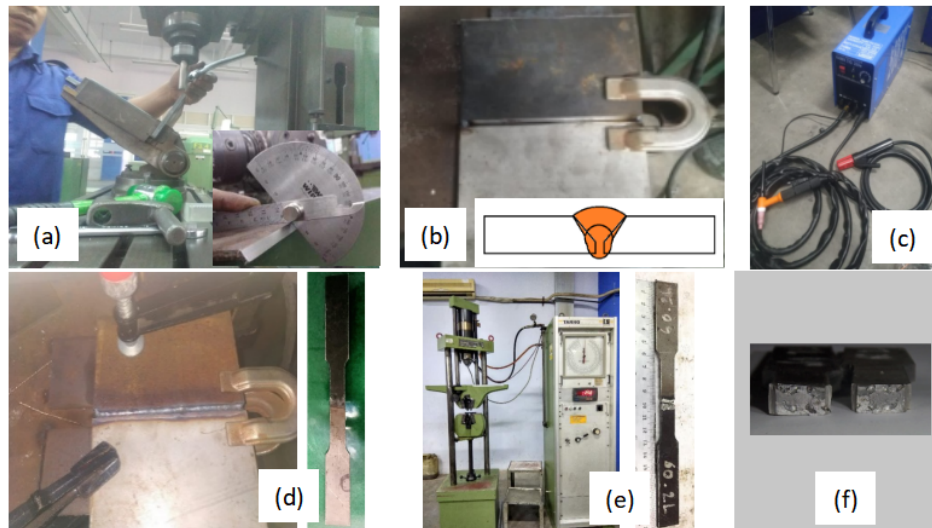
(a) Preparation of welded plate material by making side grooves at a 30° angle with a milling machine, (b) bonded with welds for setting the distance between the bimetallic, (c) welding with TIG Welding equipment, (d) cutting and shaping into a standard tensile test specimen size, (e) tensile testing with a Universal Testing Machine, and (f) the fracture surface of the broken specimen
